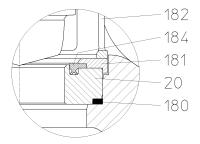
Soft seal, flat gasket & O-ring - Detail Y
